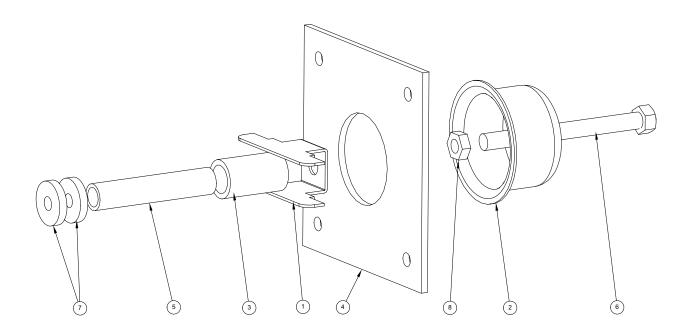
CDS 4.8 Soap Jug Tray Assembly D-4178 Rev C
